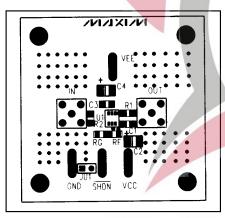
SOT23 High-Speed EV Board Component Placement Guide— Component Side
